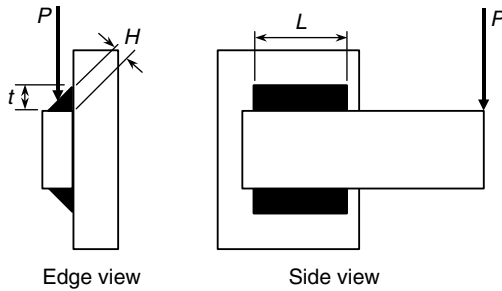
Fillet welds in shear and torsion.
